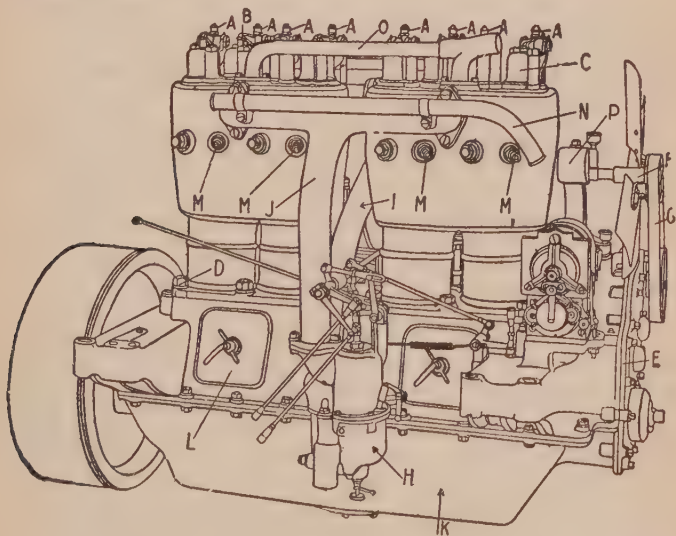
Pope-Hartford engine. A, valve operating lever grease cups; B, valve operating lever; C, valve cage cover; D, cylinder hold down nut; E, timing gear case cover; F, cooling fan; G, cooling fan belt; H, carburetor; I, carburetor hot air pipe; J, gasoline inlet upper pipe; K, engine crank case cover; L, engine crank case hand hole cover; M, spark plug; N, ignition wire tube; O, water return pipe; P, fan bracket.
